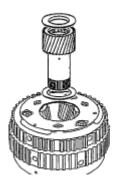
Identifying Thrust Washer Of Rear Planetary Gear Component Courtesy of MAZDA MOTORS CORP.
